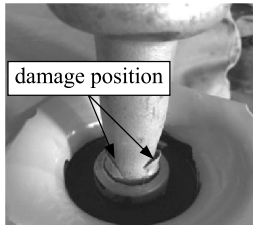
Deformation of insulator steel foot before mechanical failure.
